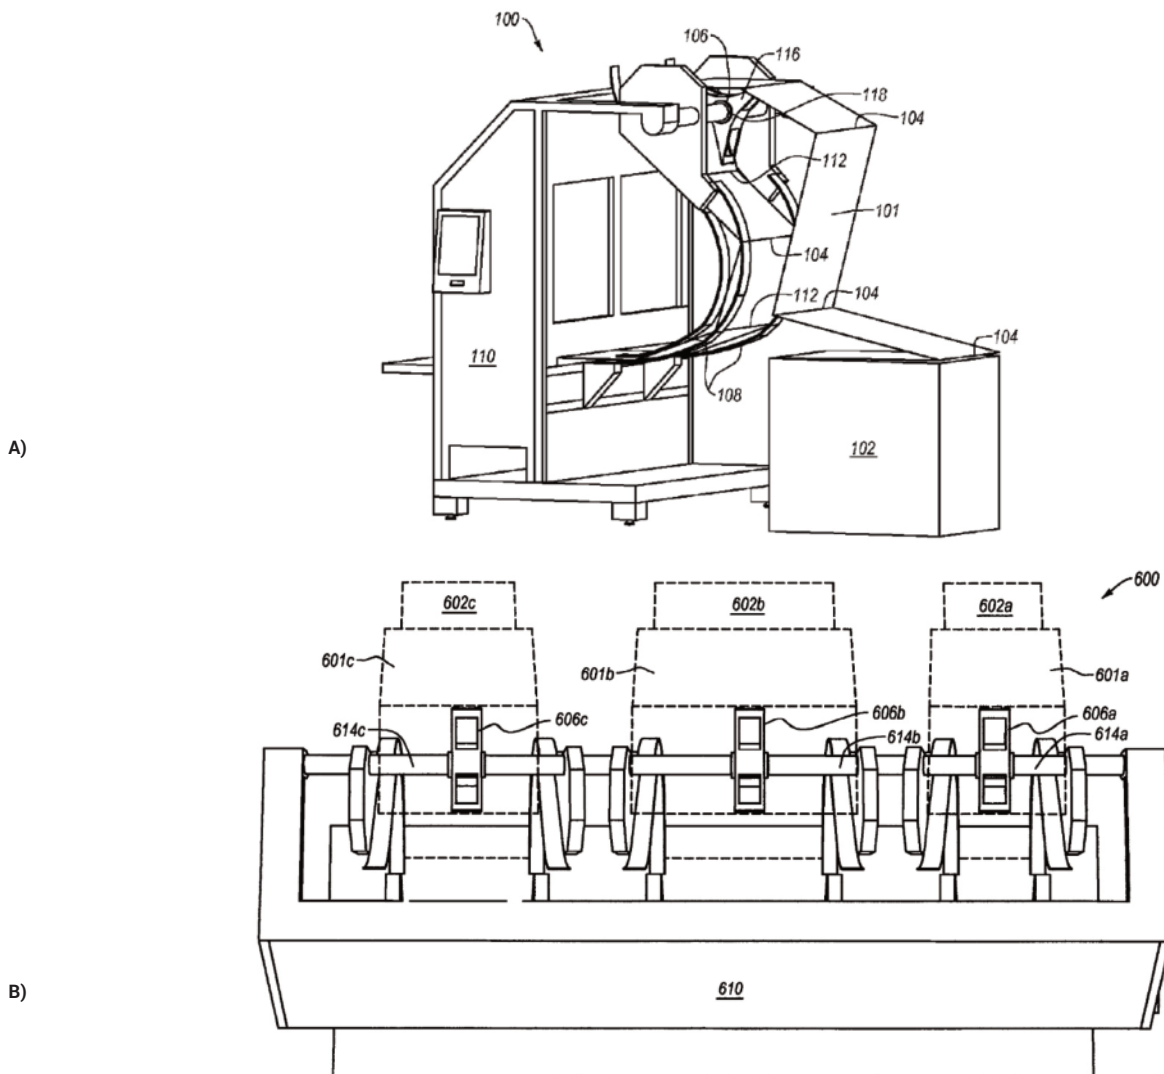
SINGLE (A) AND MULTI-STREAM (B) FEEDING WITH FANFOLD BOARD, AS DEVELOPED BY PACKSIZE COMPANY. US PATENT WO2010091043A1.
